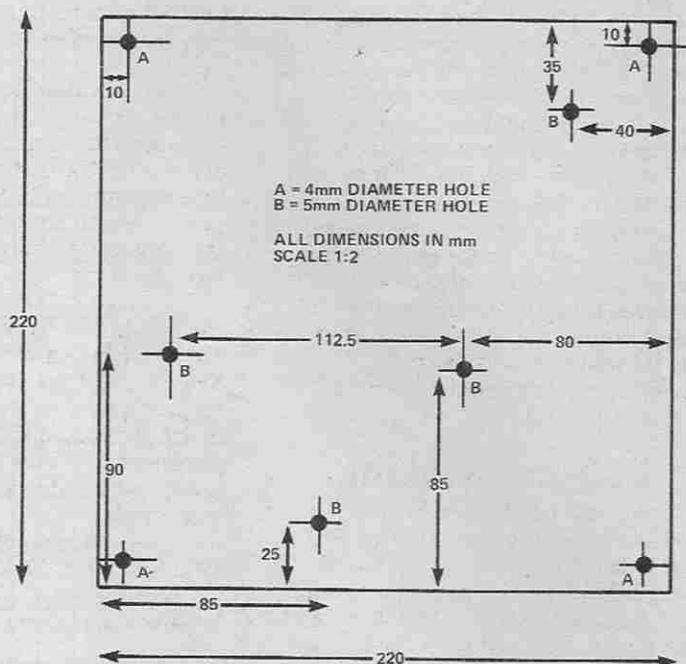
This diagram shows the drilling positions for the choke and mounting screwholes on the crossover panel.
